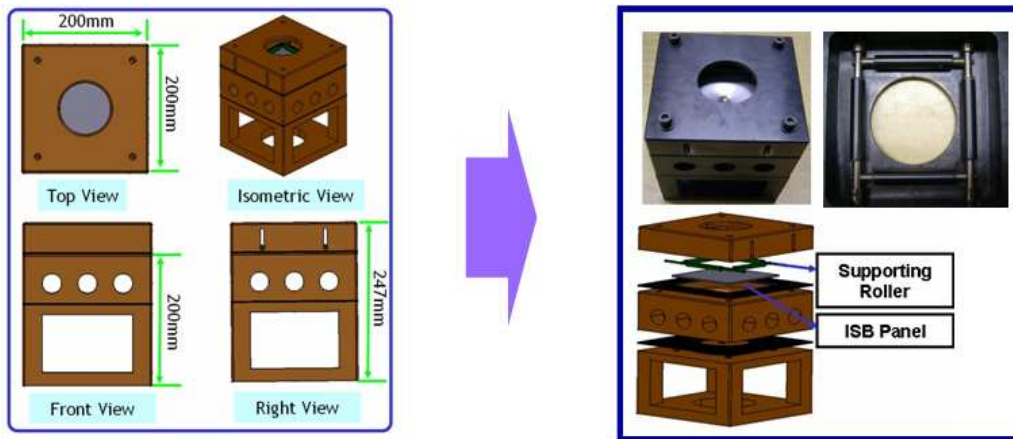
Fixture of specimen for the case of drawing boundary conditions
